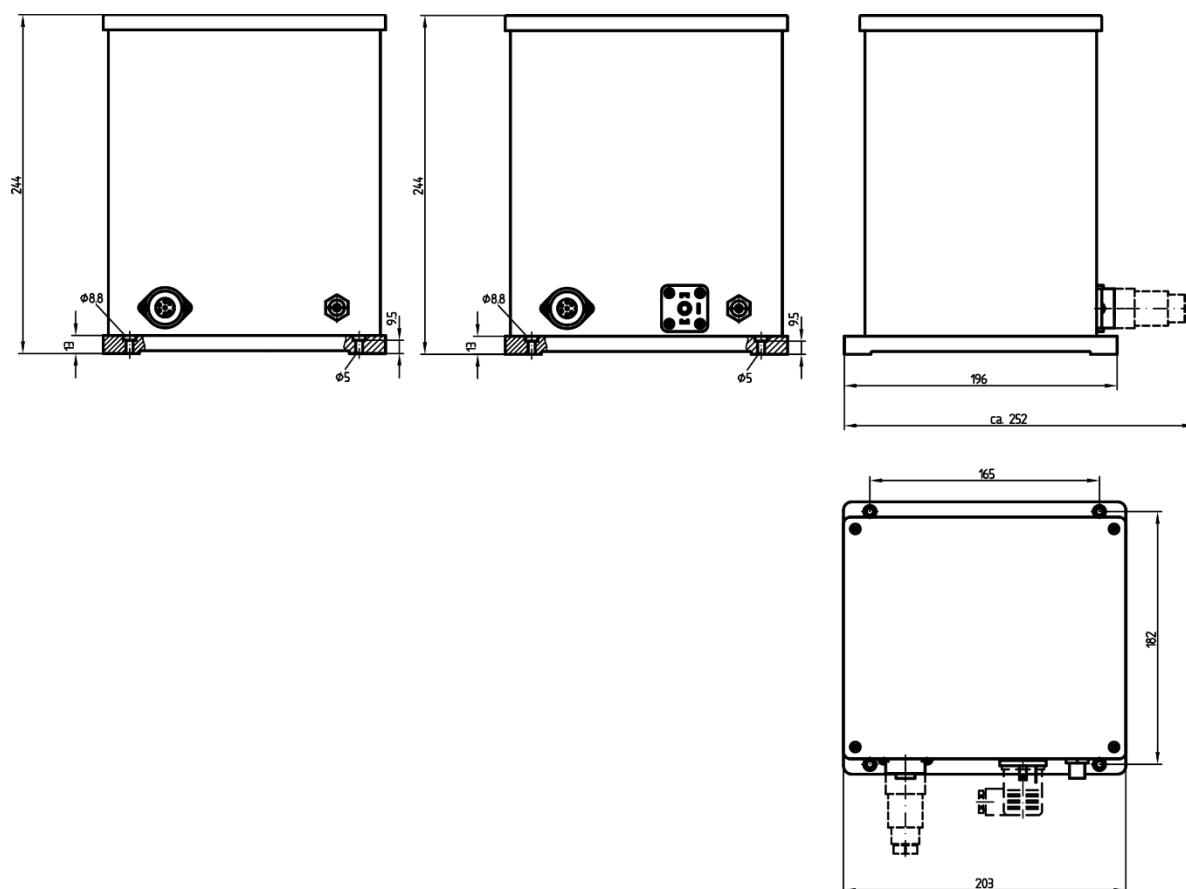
Dimensional drawing 1 FBU / 1 FBV
